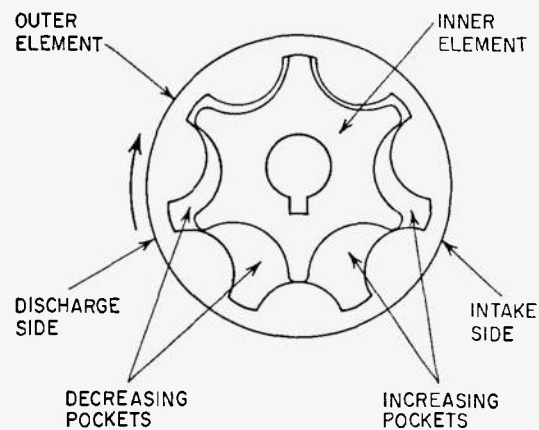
Gerotor Internal Gear Hydraulic Pump
